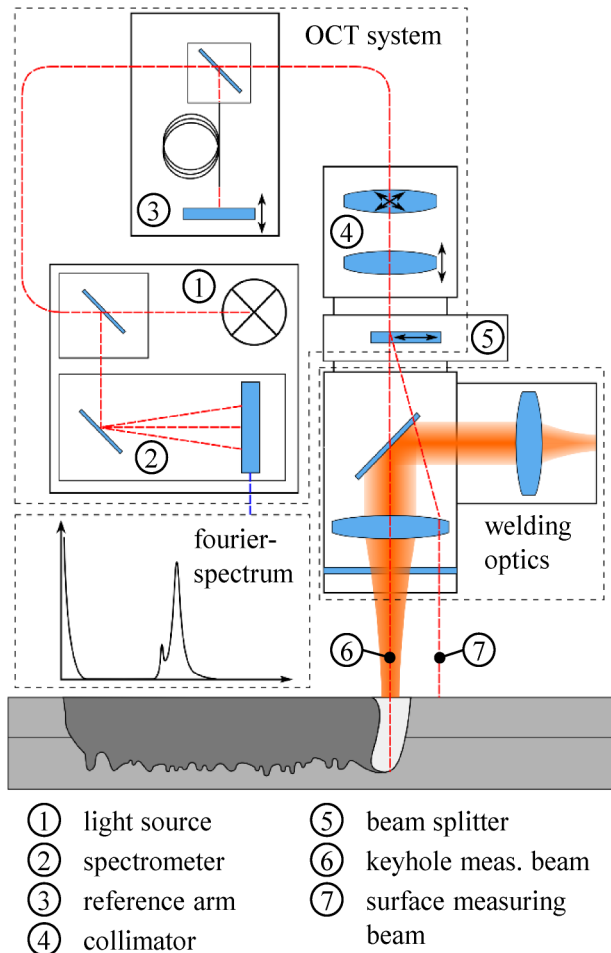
Optical setup of the welding optics equipped with the sensor system based on FD OCT.
